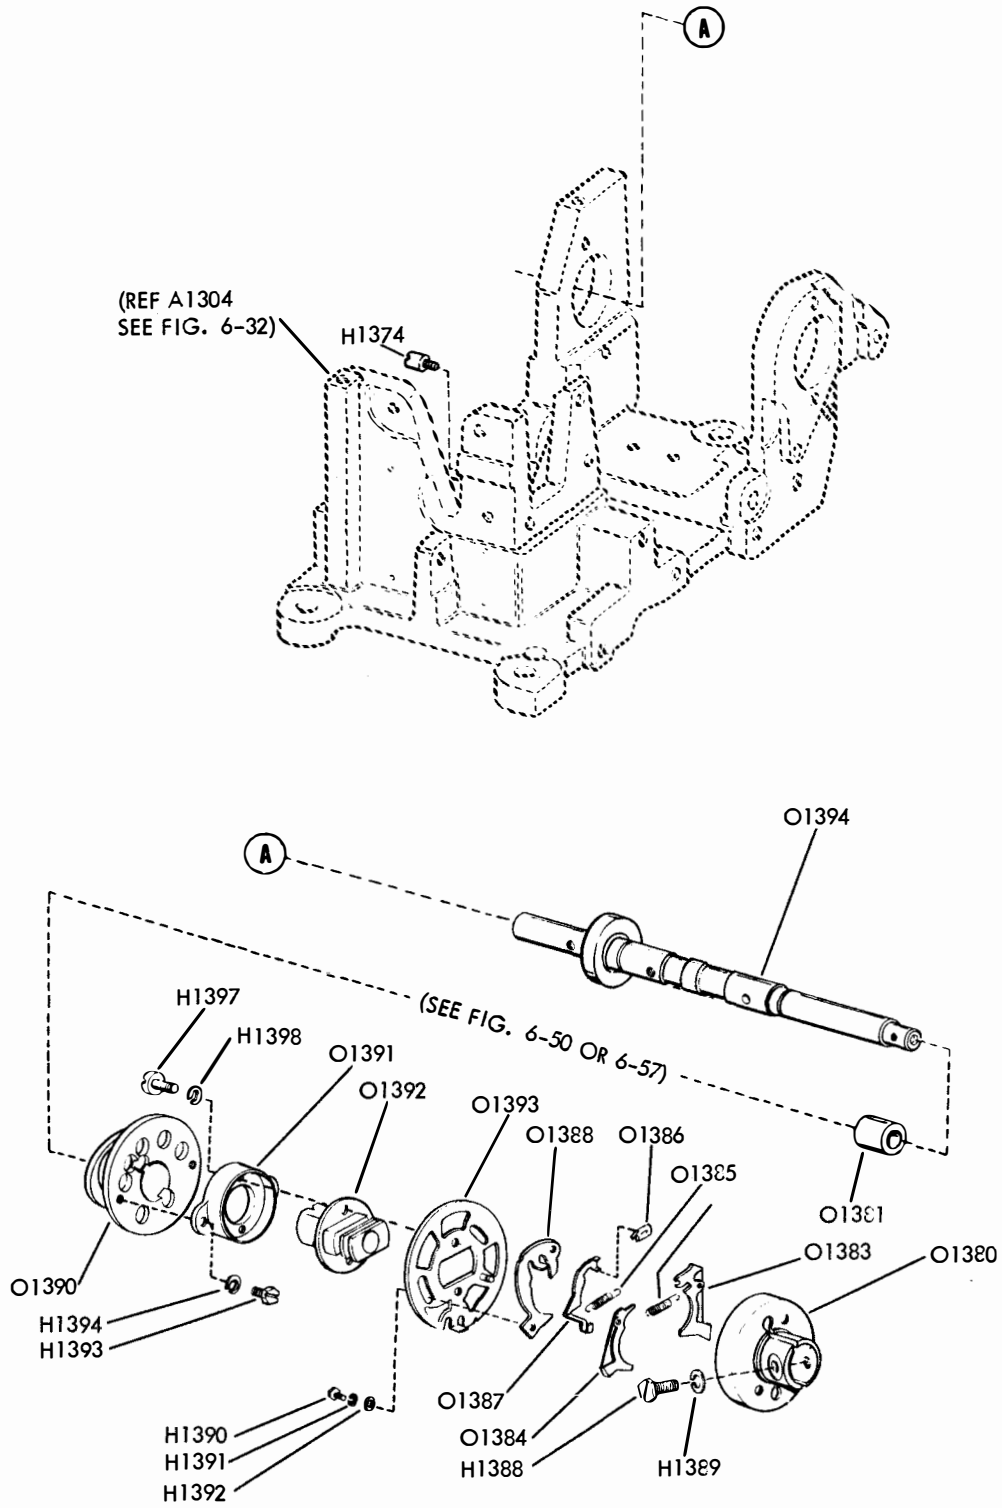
Typing Reperforator, Frame and Main Shaft Mechanisms
